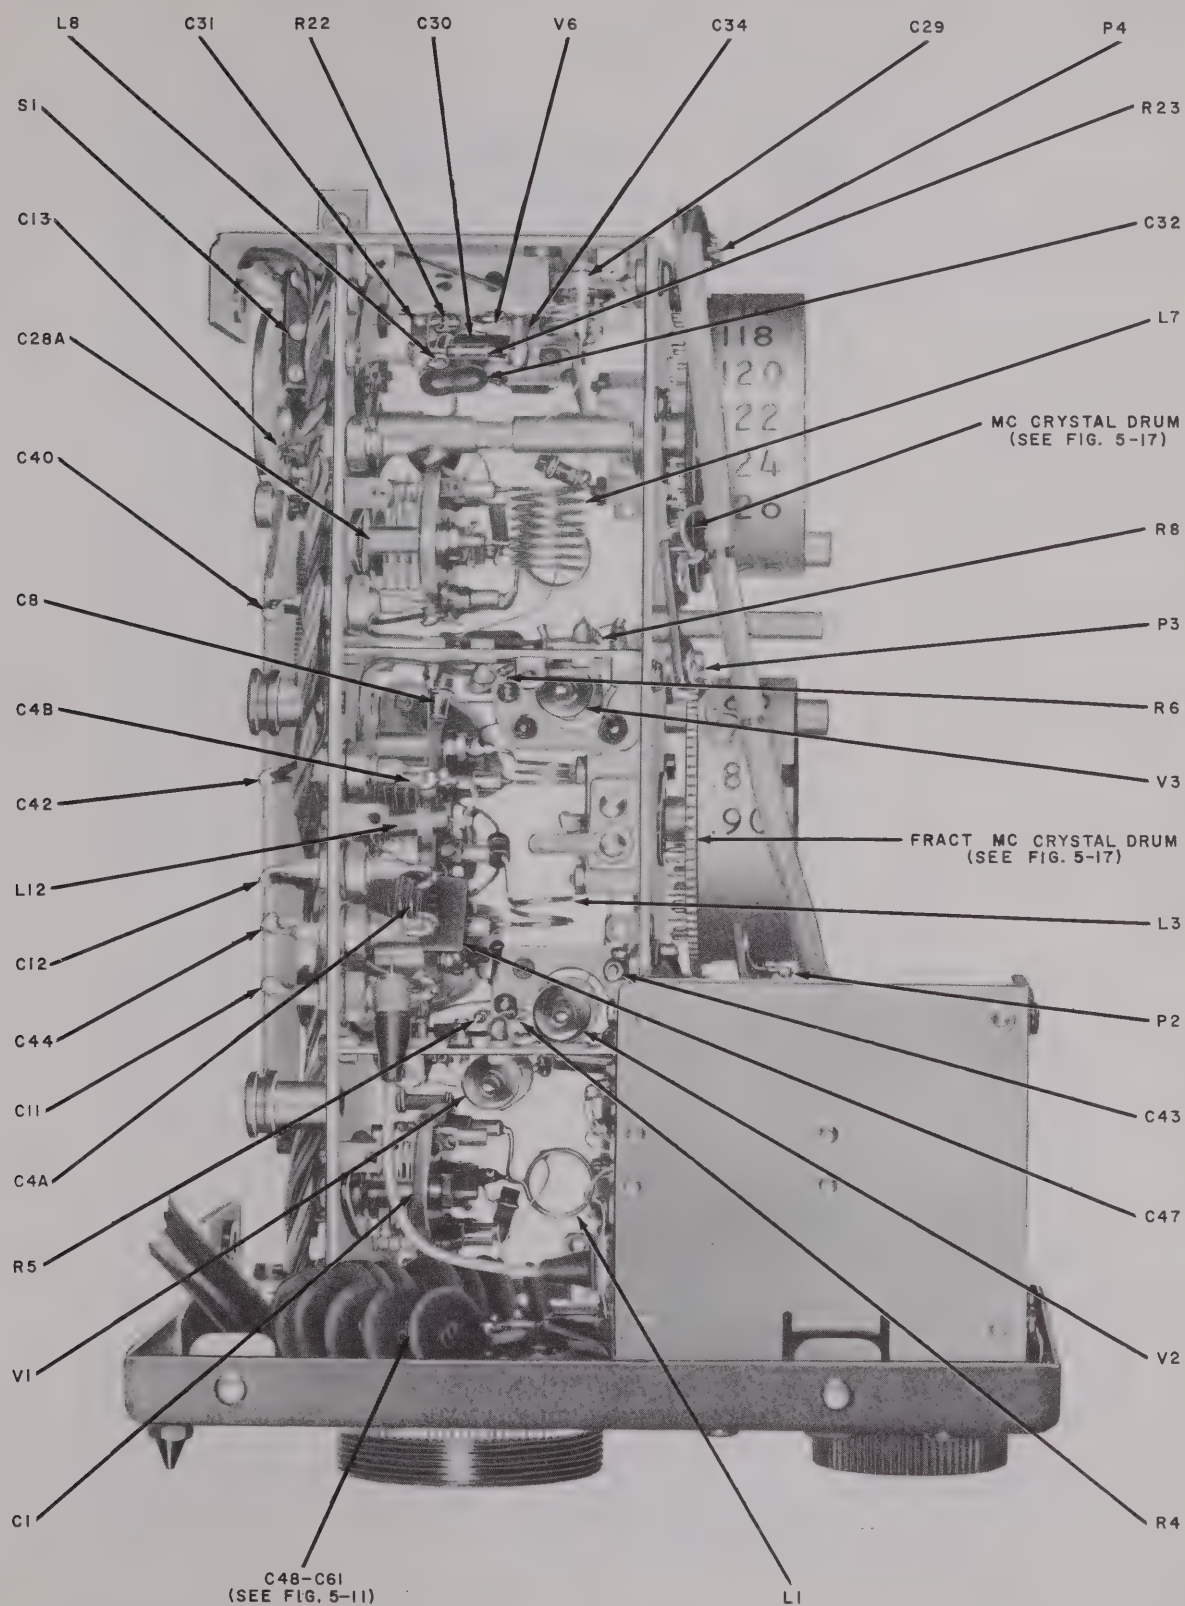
R-34A Receiver, R-f/I-f Assembly, Left Side View
